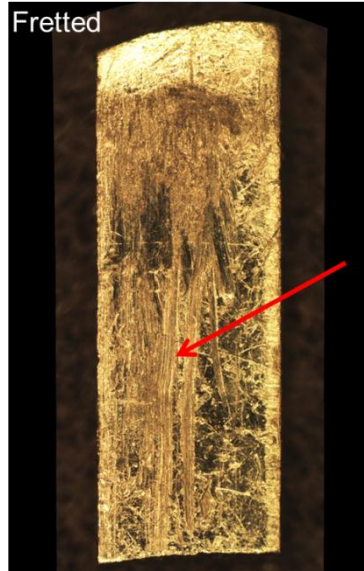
Deep grooves and asperities on a tested spring caused by relative motion between the spring and pin
